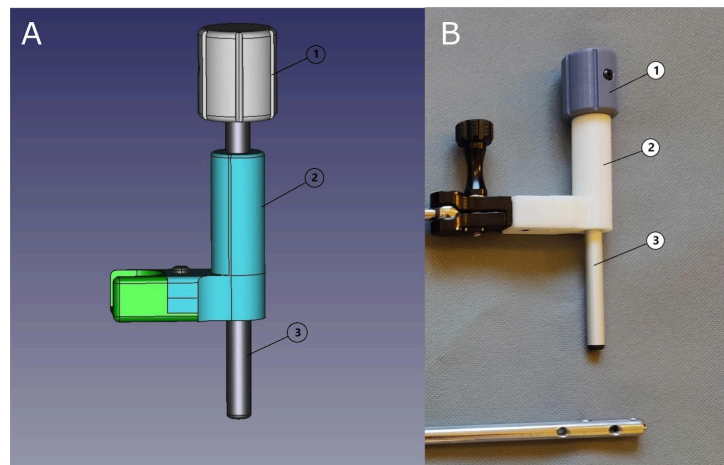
The design of the magnetic probe. A. freeCAD assembly model; B. Magnetic probe integrated with NIMS. 1. Probe handle; 2. NIMS probe sleeve; 3. Aluminium tube containing the magnet.
